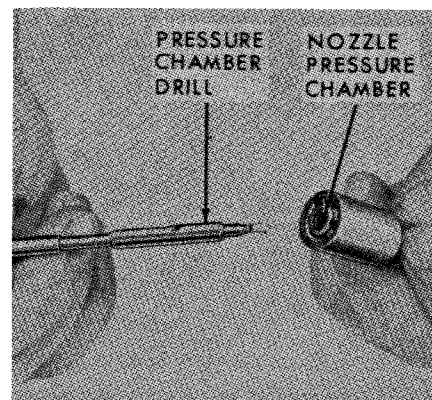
Cleaning nozzle tip cavity with pressure chamber drill.
